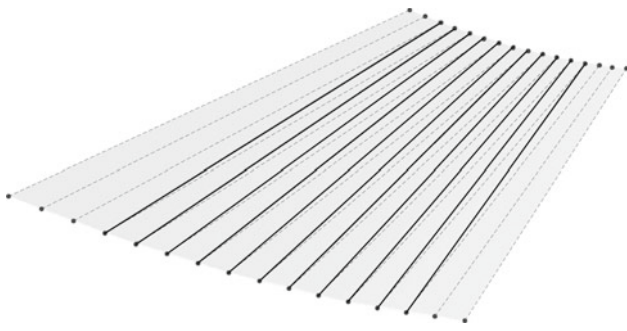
An enlarged view of the cutter contact lines in the case of 60 CL's
